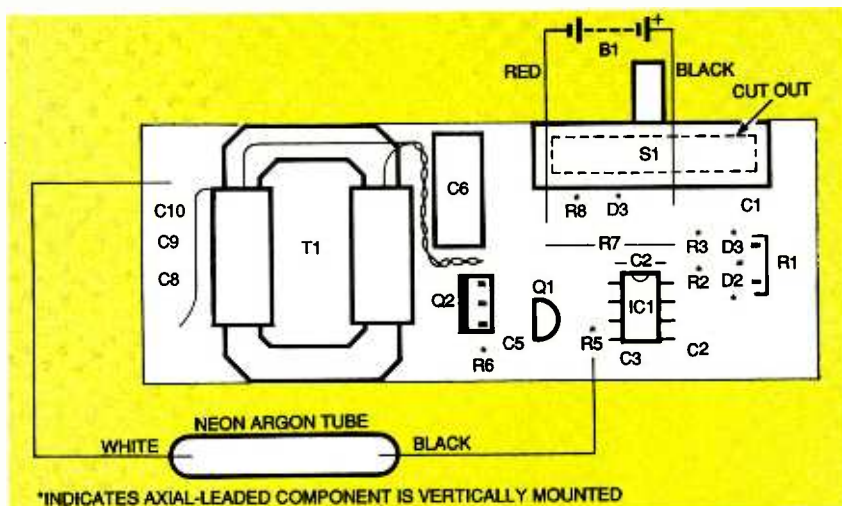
DRIVER CIRCUIT PARTS PLACEMENT DIAGRAM. The circuit can be built by point-to-point wiring on 0.1-inch grid perforated board. Transformer T1 is a non-standard component.
